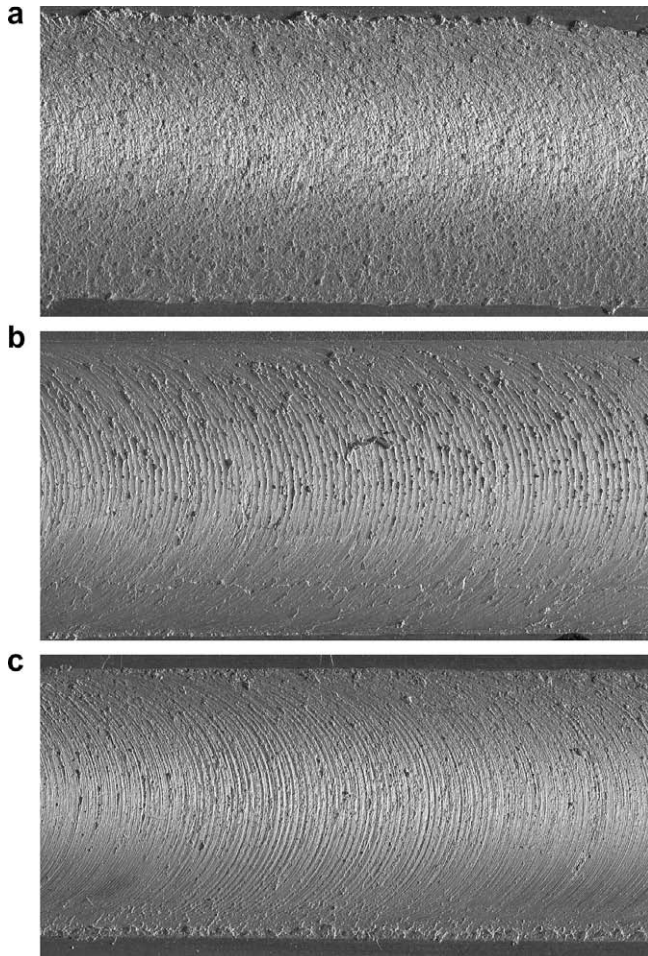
Weld crown appearance for the S55 (a), S66 (b) and D56 (c) welds.
